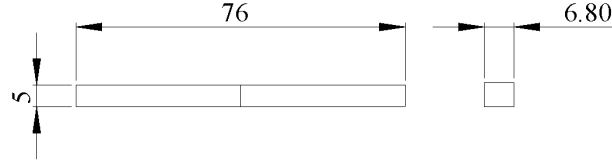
Butt-brazed rectangular beam specimen (dimensions in mm)
